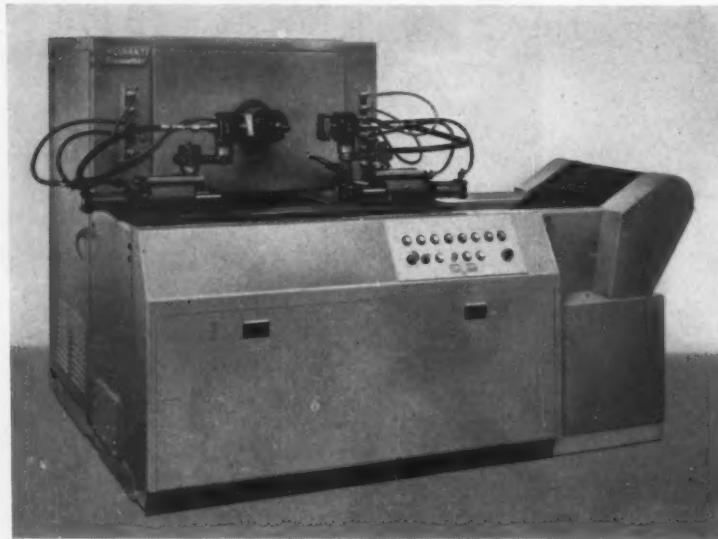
Flame-heating machine assembled from Cincinnati standard building-block units
